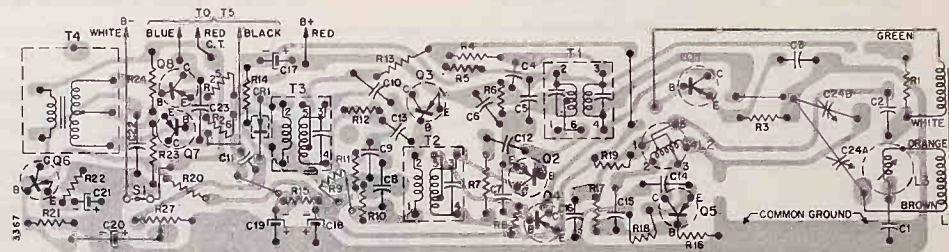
View of Printed Wiring Board. NOTE: Gray area represents printed wiring; black symbols and lines represent components and wiring on opposite side.
